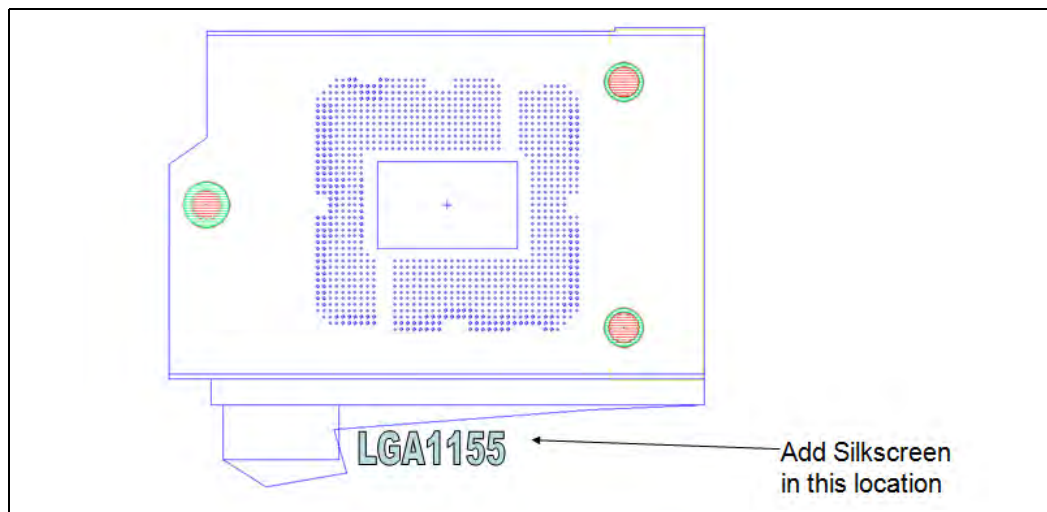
LGA1155 Socket Land Pattern (Top View of Board)
